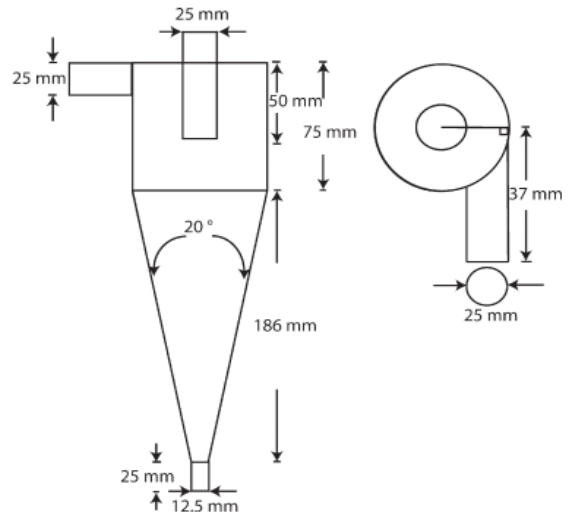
Geometry and dimensions of the cylindrical hydrocyclone [11].
